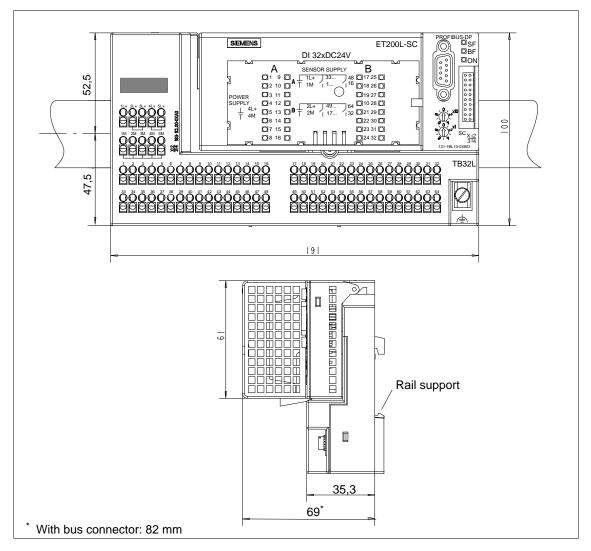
The TB 32L Terminal Block with the Electronics Block Clipped On, Dimension Drawing
